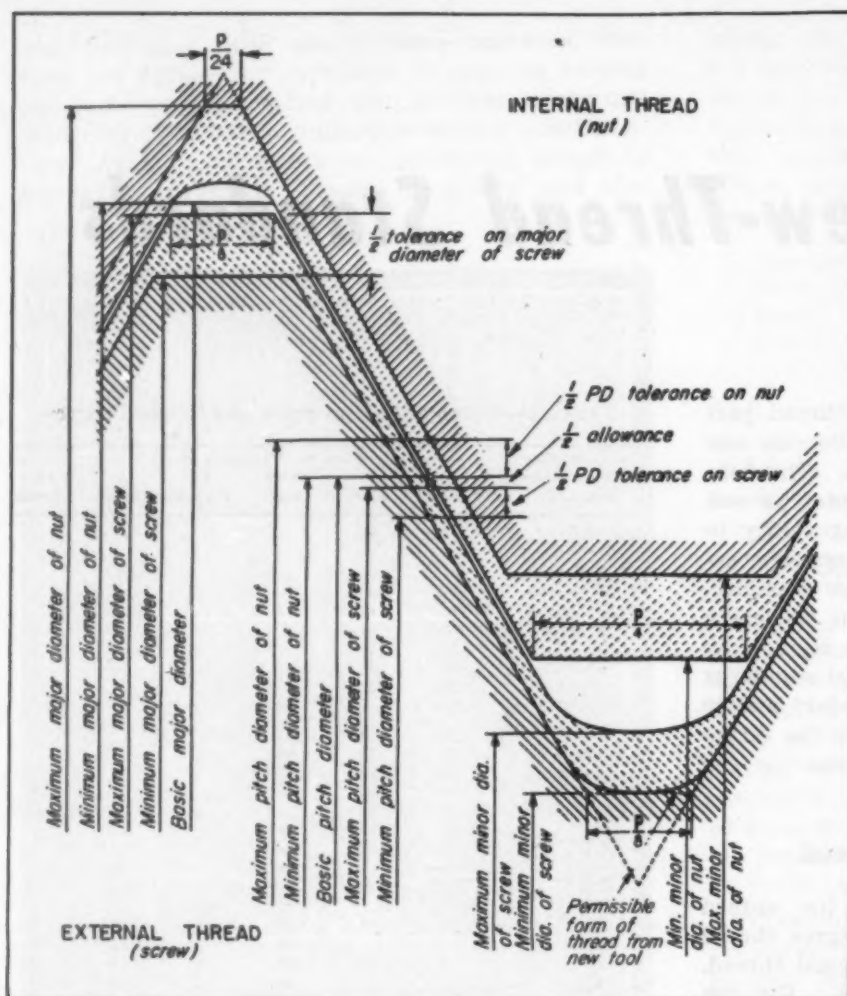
Pictorial representation of the critical dimensions which must be controlled in the manufacture of screw thread components, showing the tolerance ranges
